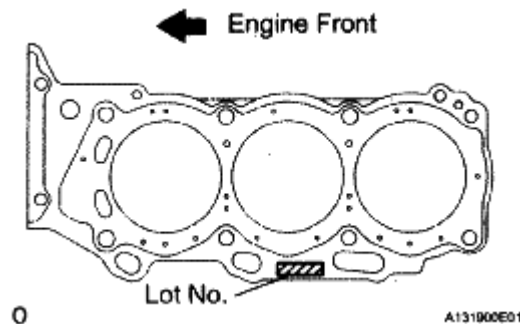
Placing Cylinder Head Gasket On Cylinder Block Surface With Front Face
